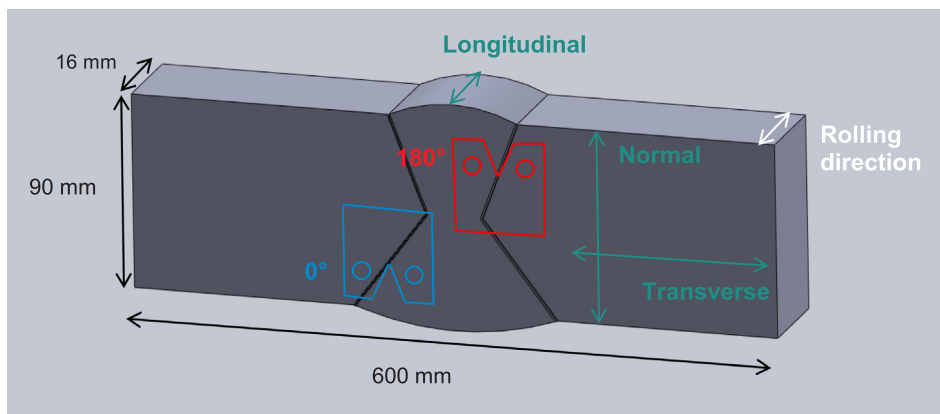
Schematic representation of a 16 mm thick welded slice and the location of C(T) specimens extracted from the welded slice.
